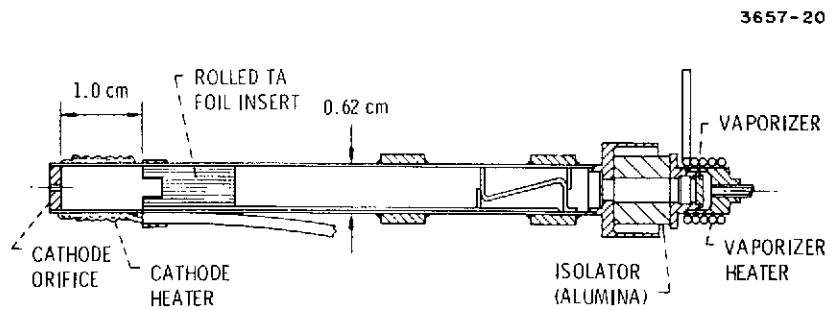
Drawing of CIV assembly, including cathode pole and magnetic baffle.
